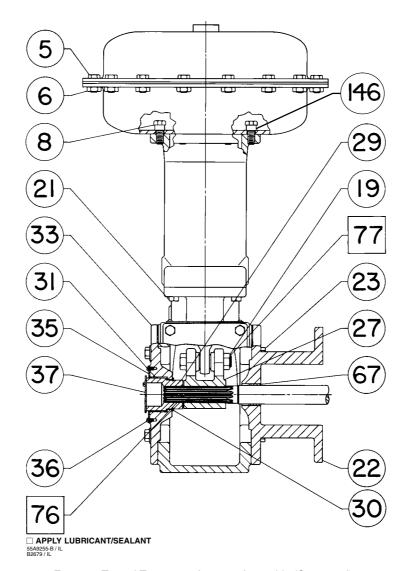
Typical Type 1051 Actuator Assembly (Continued)
